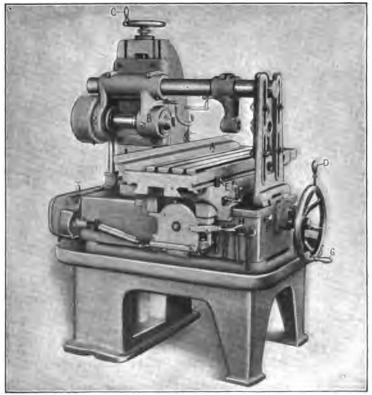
Brown & Sharpe Plain Milling Machine of the Lincoln Type
